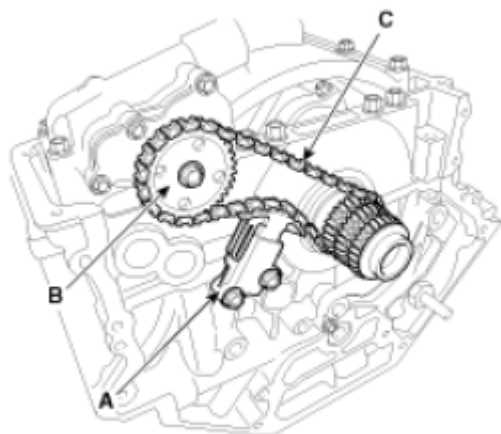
Identifying Oil Pump Chain Tensioner, Oil Pump Sprocket And Oil Pump Chain
